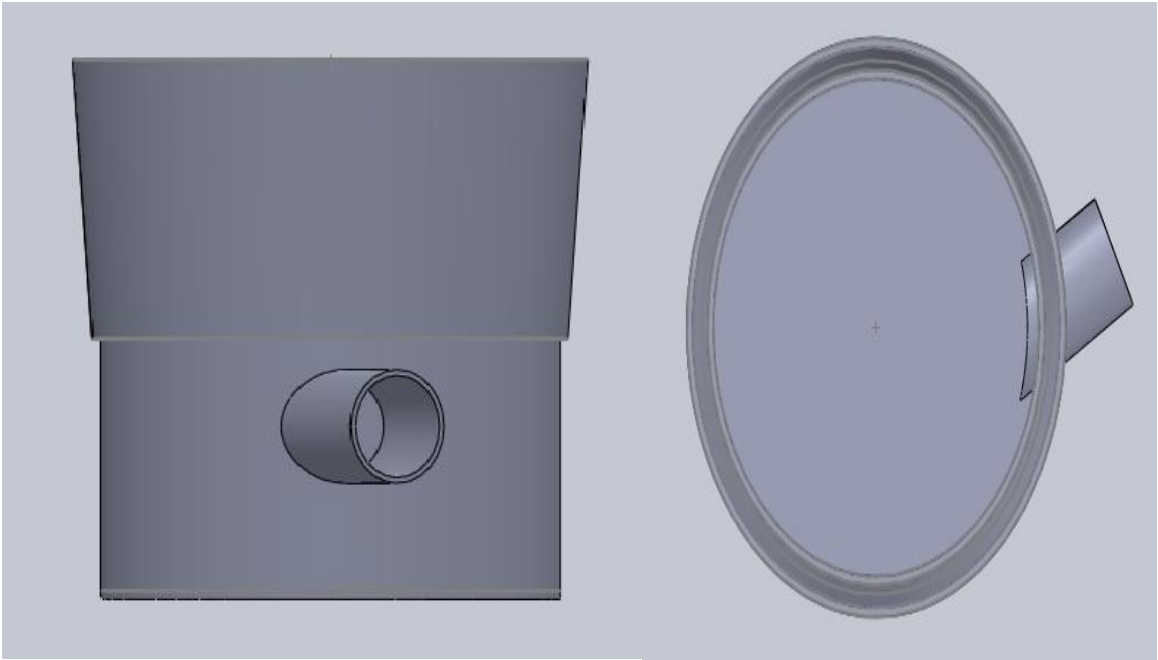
AIR INLET PIPE AT 30 ° TO THE VERTICAL AXIS
